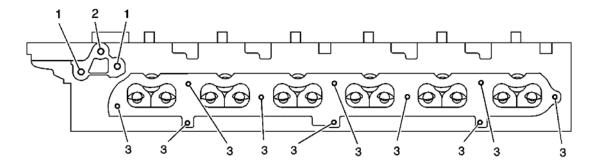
Cylinder Head Thread Repair - Intake Manifold Deck View Courtesy of GENERAL MOTORS CORP.
